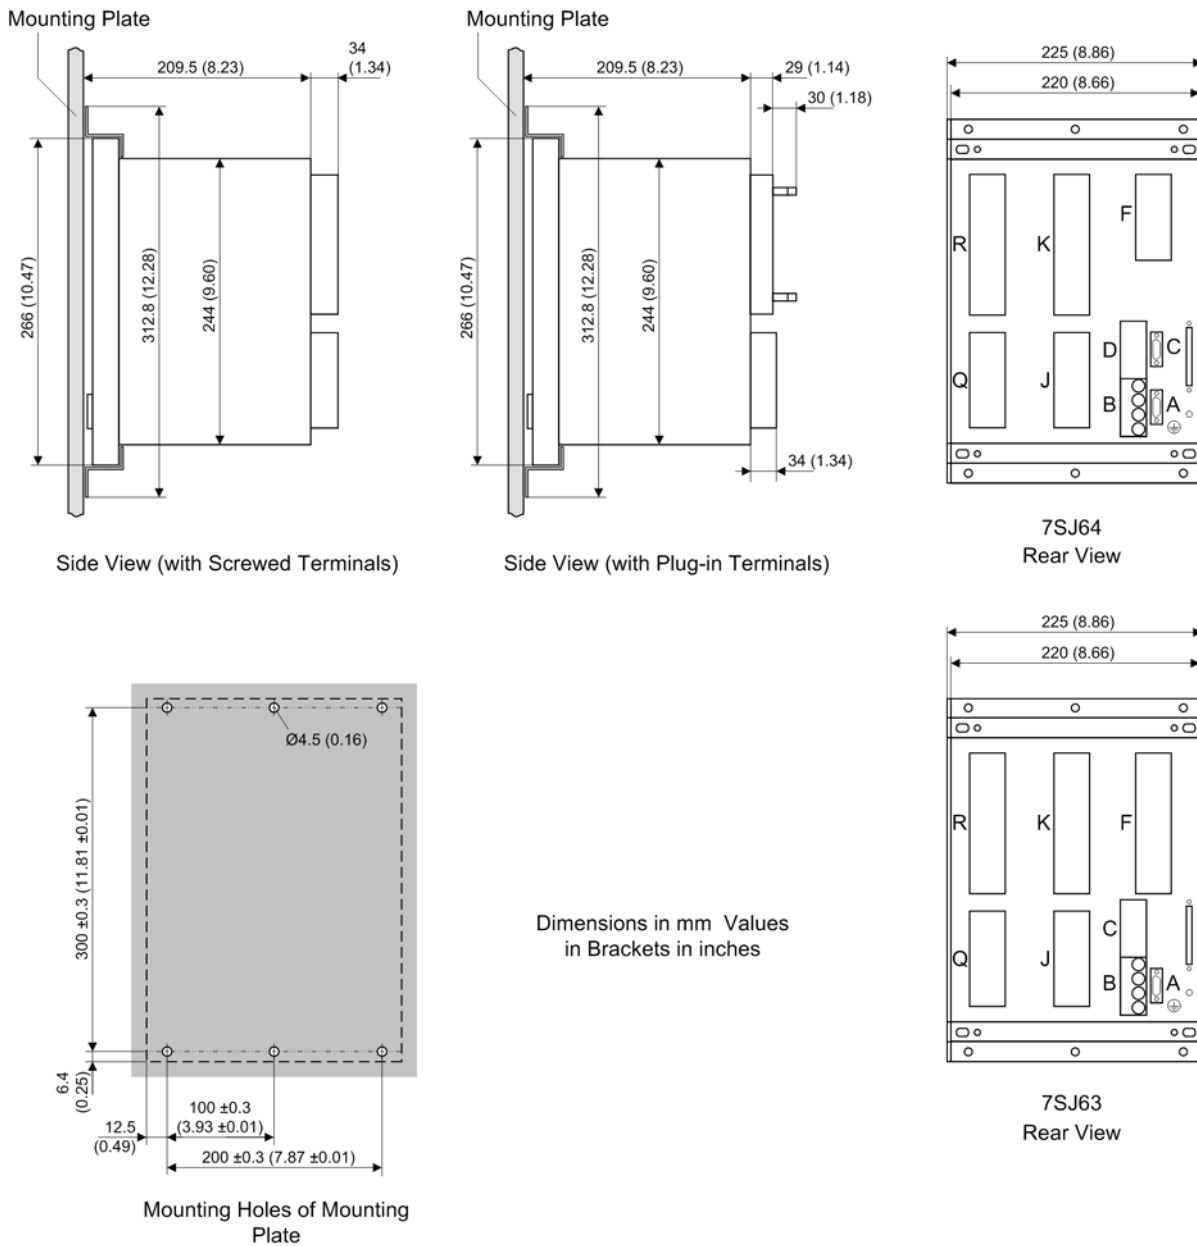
Dimensional drawing of a 7SJ63 or 7SJ64 (housing size 1/2)) for mounting with detached operator panel or without operator panel
